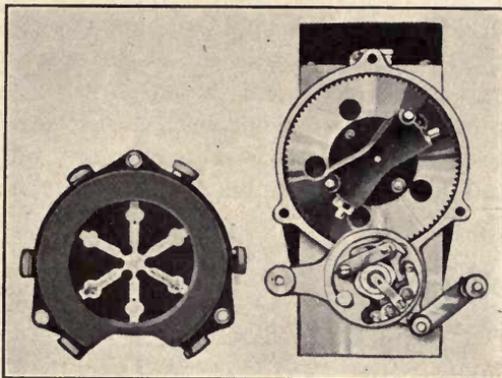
Dixie 12-cylinder magneto distributor cap removed.
